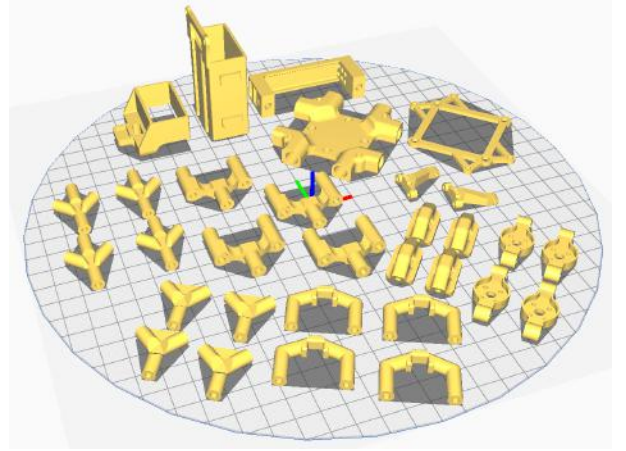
All 3D printed parts (24 in TPU 95A, bottom and 7 in ABS/PLA, top) are shown on this 260mm diam. build plate. The biggest one is only 65x65x9mm. All parts, besides the small battery lid (top left), were designed to print flat and without the need for extra supports, drastically reducing the risk of failed printed parts.
